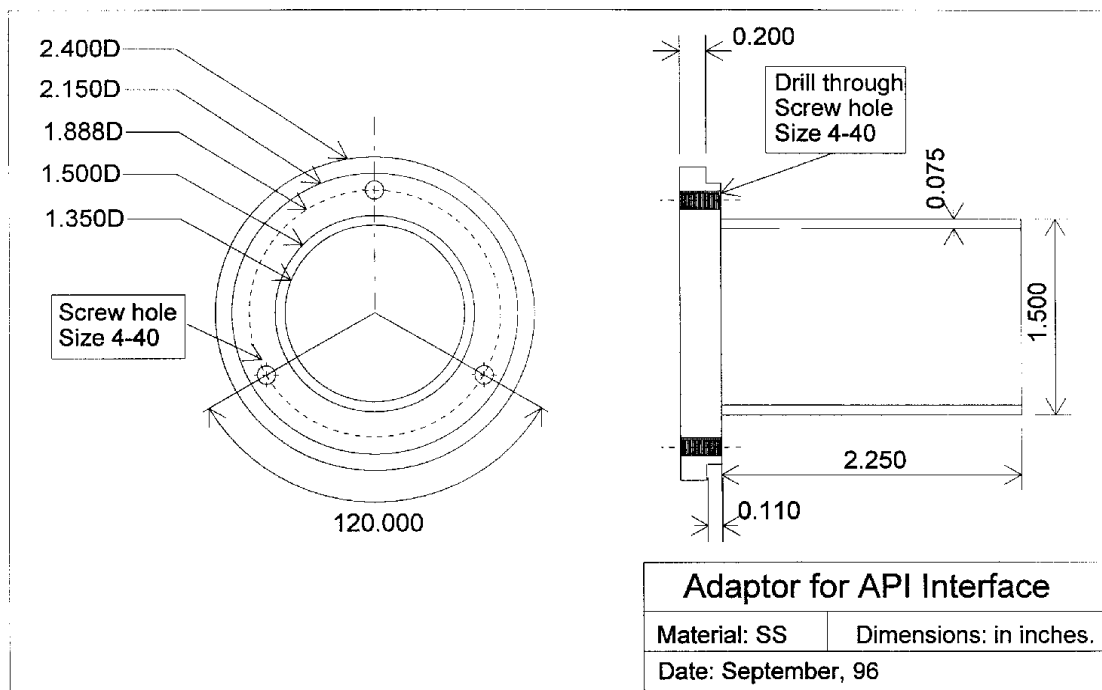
Interface coupling AMSI to heated nebulizer assembly.
